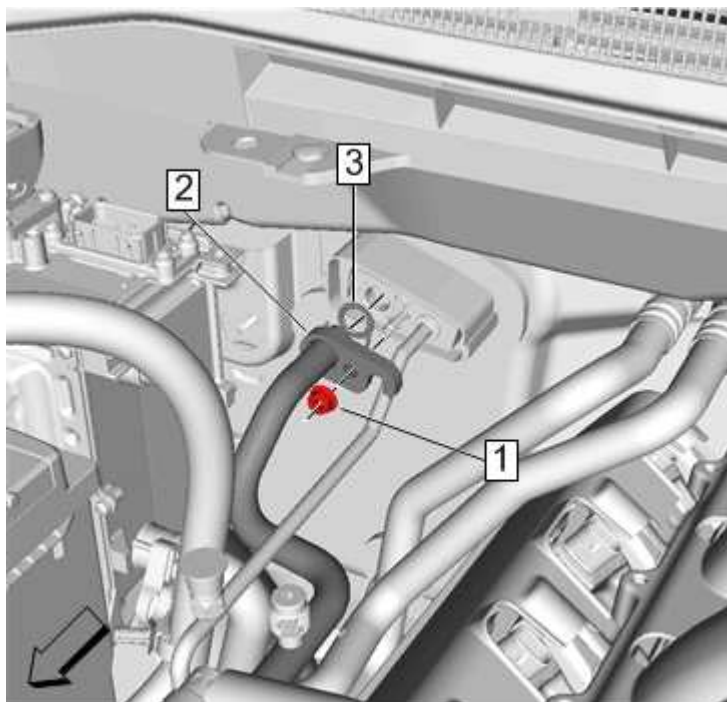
Air Conditioning Compressor Hose And Air Conditioning Evaporator Thermal Expansion Valve
